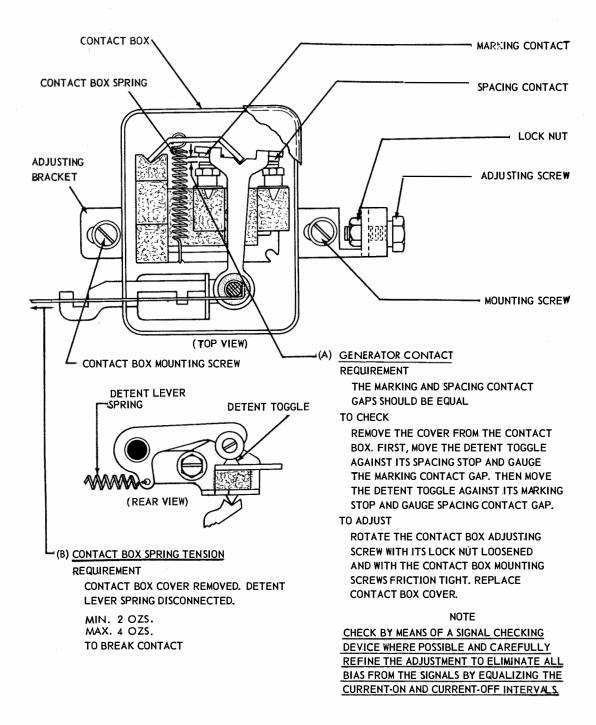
KEYBOARD, CONTACT ASSEMBLY
